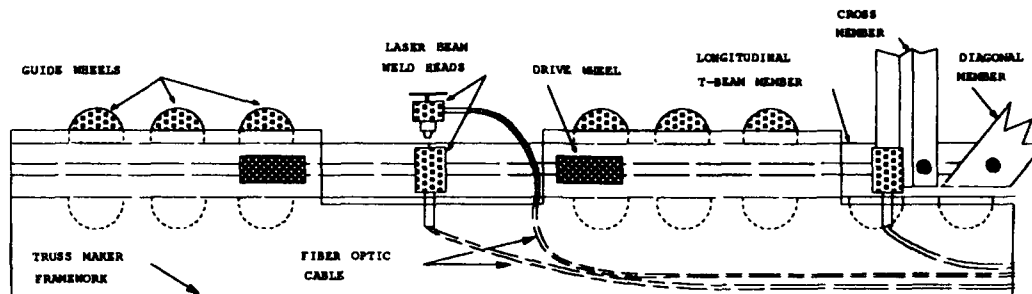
Top view of one of the truss maker's drive sections. The SFP laser beam welding system butt welds longitudinal truss members. The members are driven and held in place for welding by eight drive wheels, two for each longitudinal SFP truss maker drive section.
